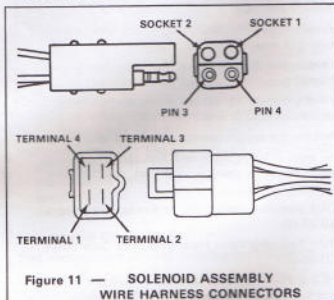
SOLENOID ASSEMBLY WIRE HARNESS CONNECTORS
